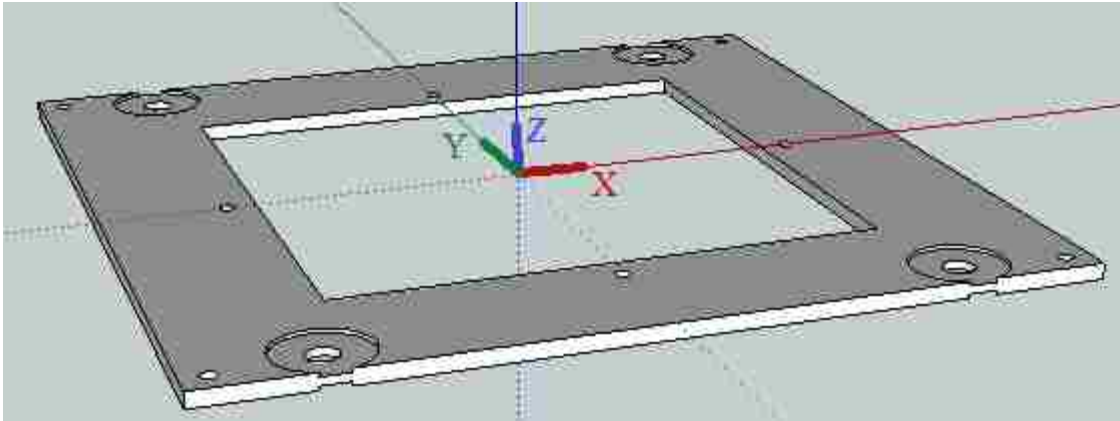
Orthogonal view of the 10x10 cm² middle trimmer aluminum plate.
